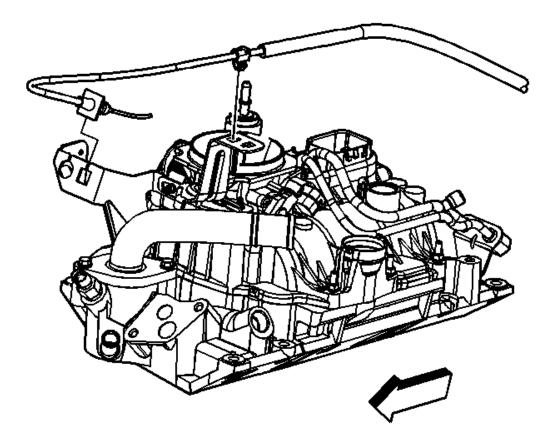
View Of Accelerator Cable To Accelerator Control Cable Bracket Courtesy of GENERAL MOTORS CORP.
